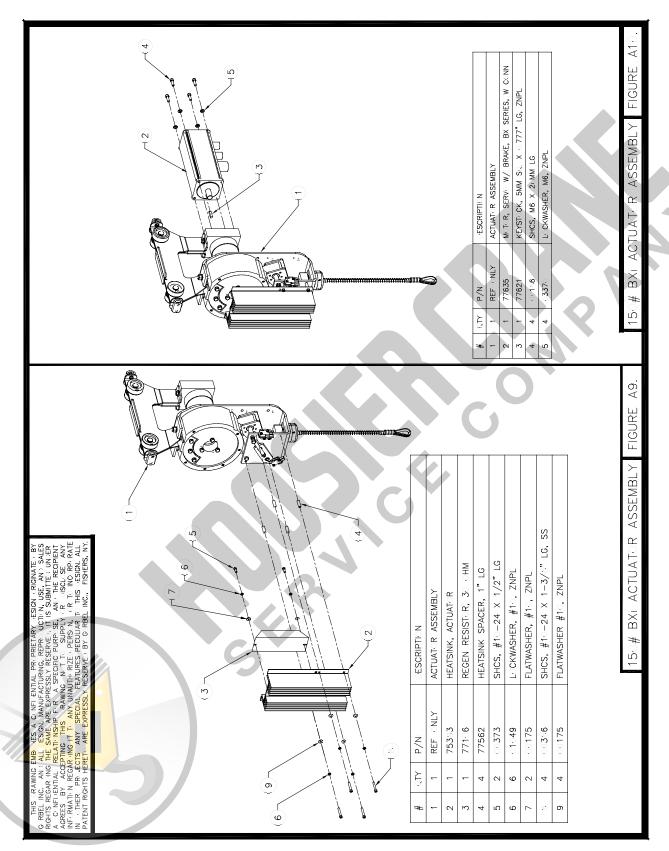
(bottom) & Figure A10 (top). 150# BXi Actuator Assembly.
